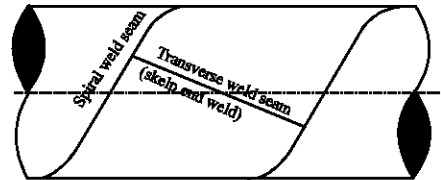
Sketch of the weld joints of the welded line pipes
